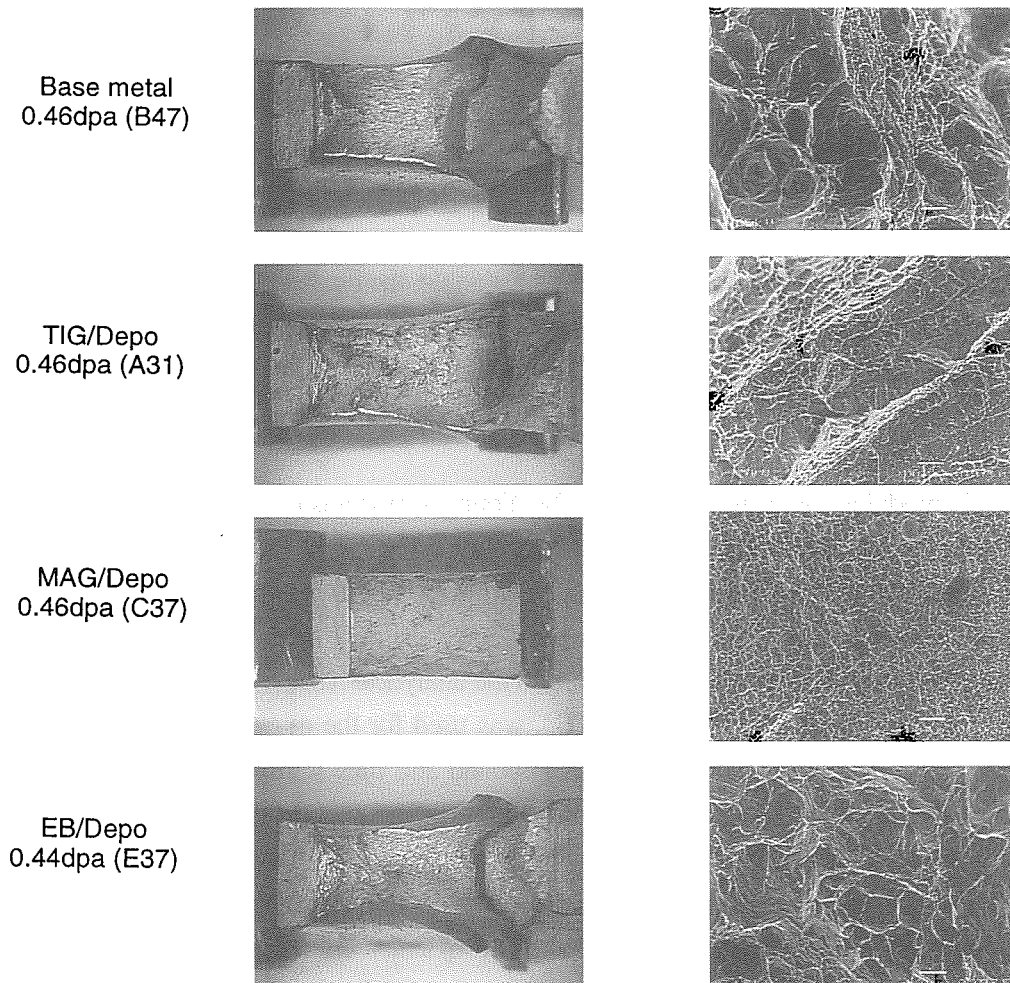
1. 3 SEM photograph of fracture surface after Charpy impact tests on 316L SS base metal and welded joint deposited metal.
